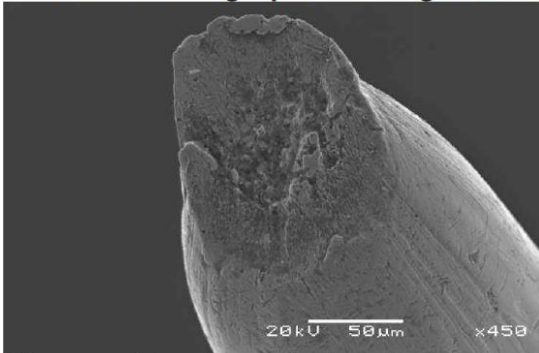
Fractograph showing typical core wire fracture geometry (x450, SEM)
